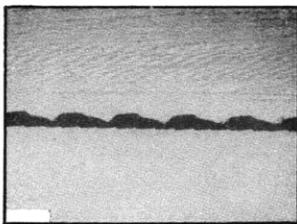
Cross Section through Contact Surfaces from which too much Metal has been cut away
